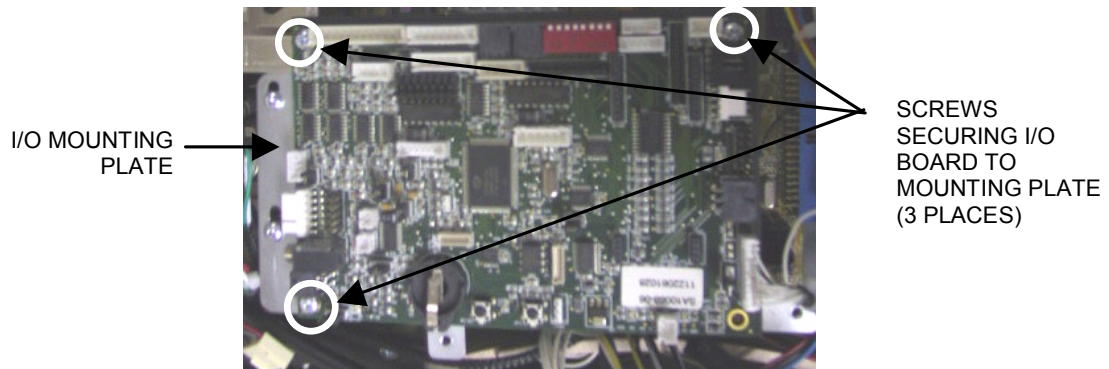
I/O BOARD AND MOUNTING PLATE
